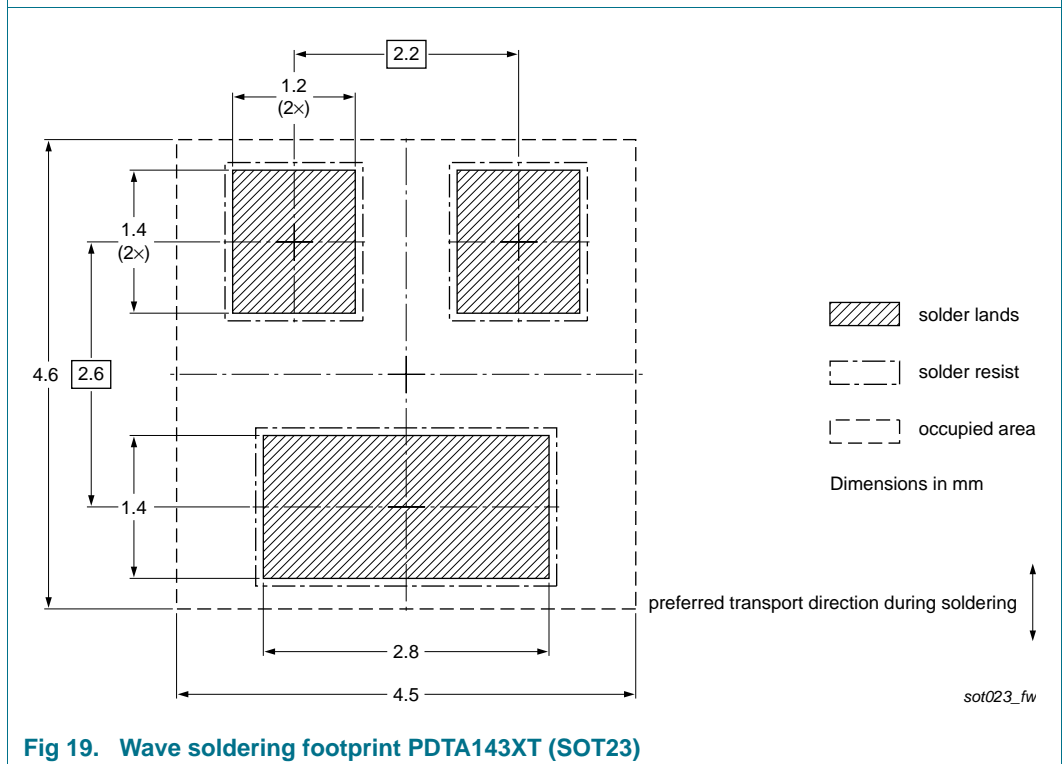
Wave soldering footprint PDTA143XT (SOT23)
